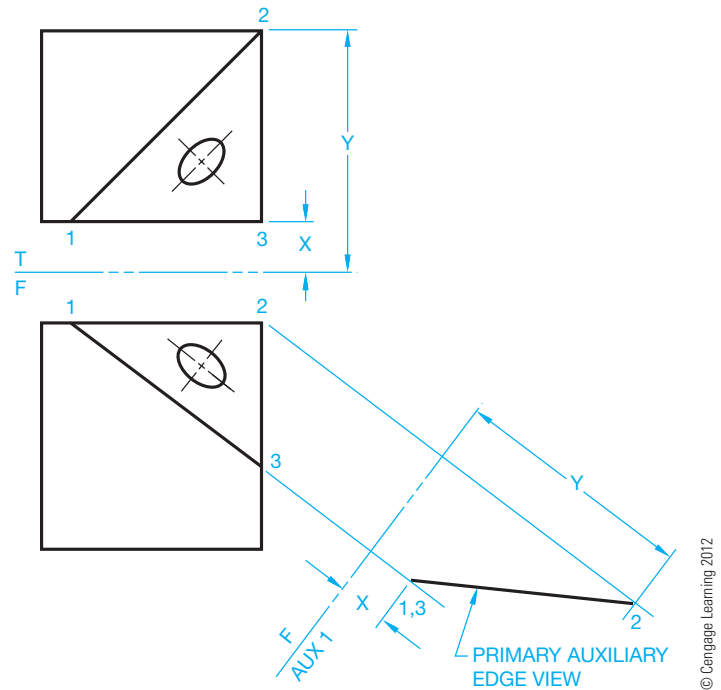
Step 2: Primary auxiliary edge view of oblique surface.
